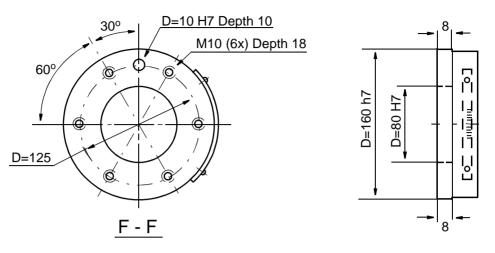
The mechanical interface (mounting flange) ISO 9409-1-A125 (dimensions in mm).
